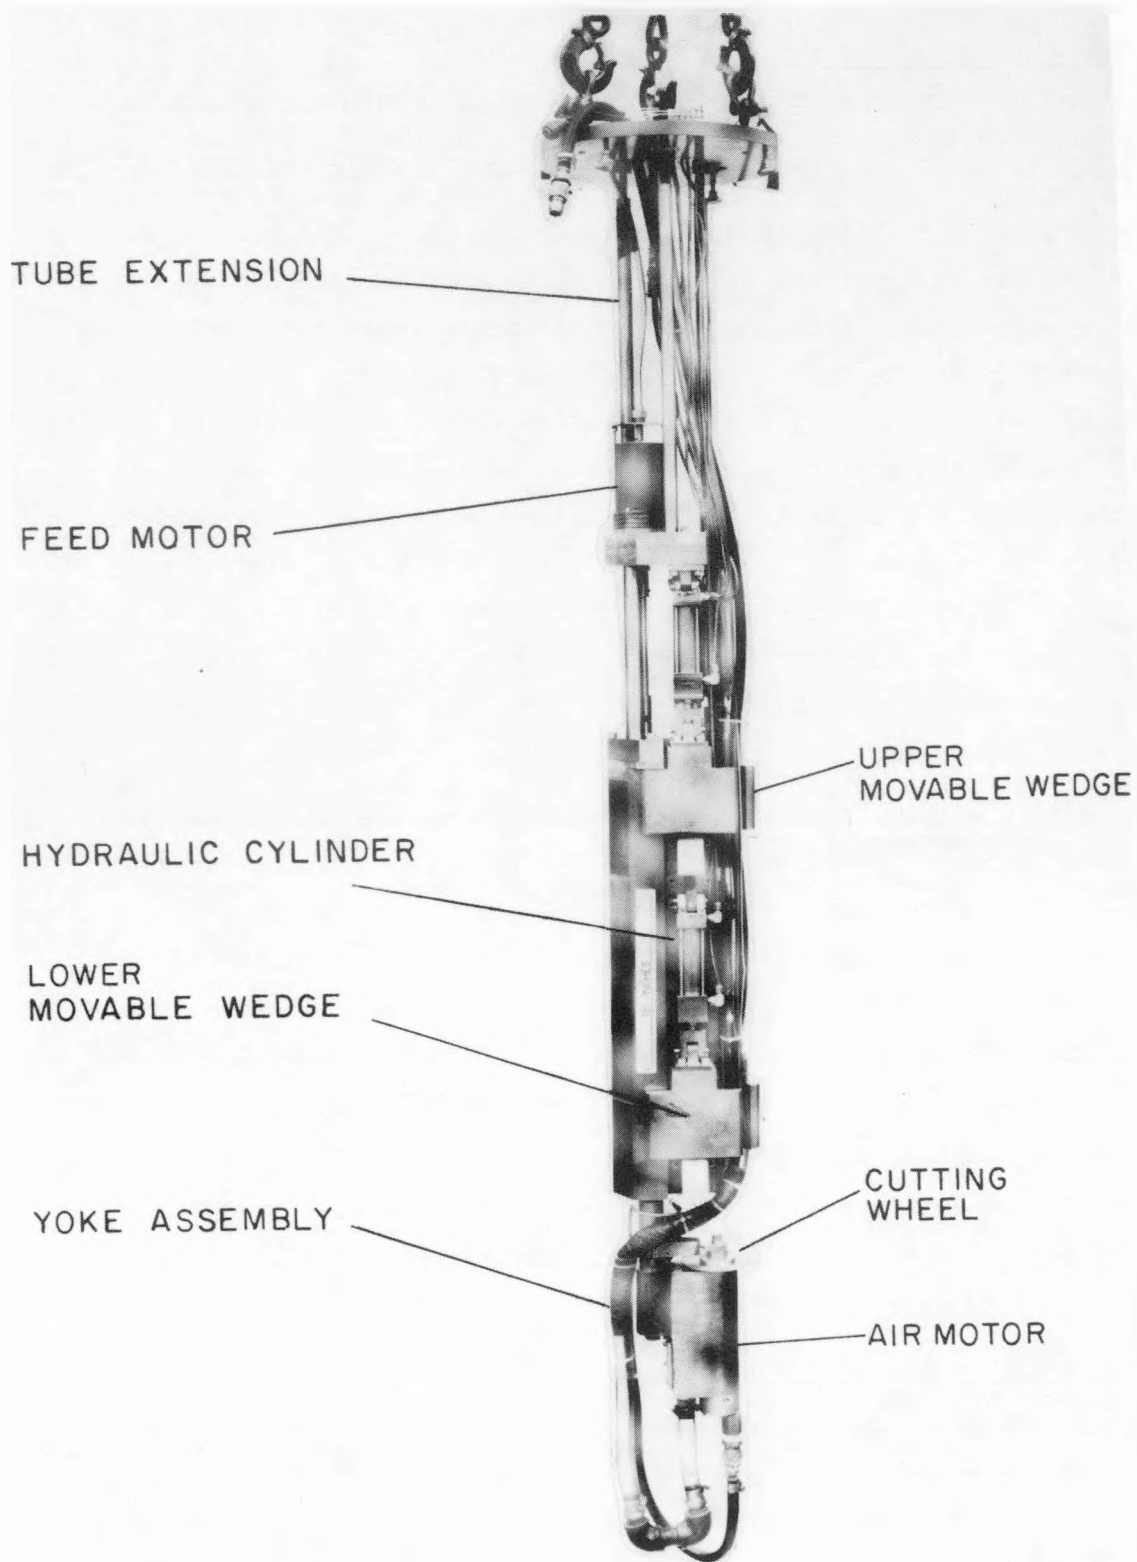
Guide Tube Extension Bolt Cutting Machine
